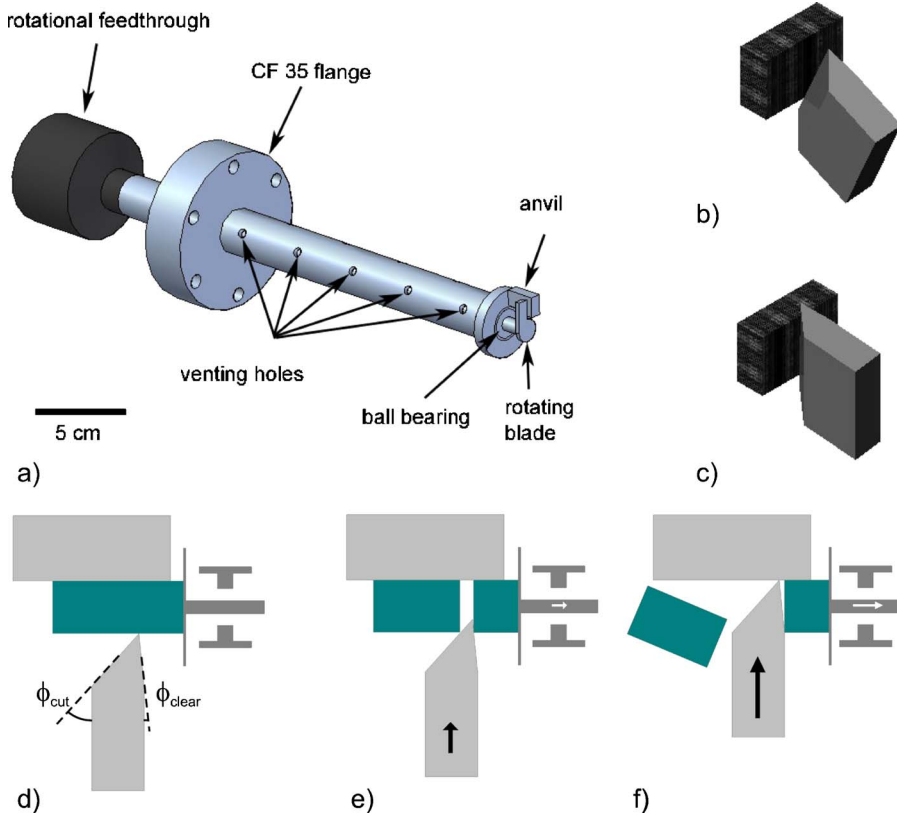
(Color online) (a) Perspective view of the single-flange cleaver. It consists essentially of three parts: a rotary feedthrough that connects to an axle holding the cleavage knife and a tube with venting holds that has the anvil welded to it. (b) Cleaving a crystal using the wire cutter principle results in a well-defined point where the cleave is initiated. In contrast to a cleaver where the blade is applied parallel to the side faces of the crystal sample to be cleaved (c), the wire cutter principle does not require perfect alignment between the cutting edge and the intended cleavage direction. (d) Schematic view of the blade with cutting angle ϕ_{cut} and clearance angle ϕ_{clear} in the initial phase of cleavage. In our setup, $\phi_{\text{cut}} \approx 42^\circ$ and $\phi_{\text{clear}} \approx -6^\circ$. (e) and (f) The negative clearance angle ensures that the cleavage plane remains unscathed when the blade slide over the sample surface after the cleave (see also online movies). The sample holder is movable along a line perpendicular to the cleavage plane, enabling the sample to move backwards [white arrow in (e) and (f)].
